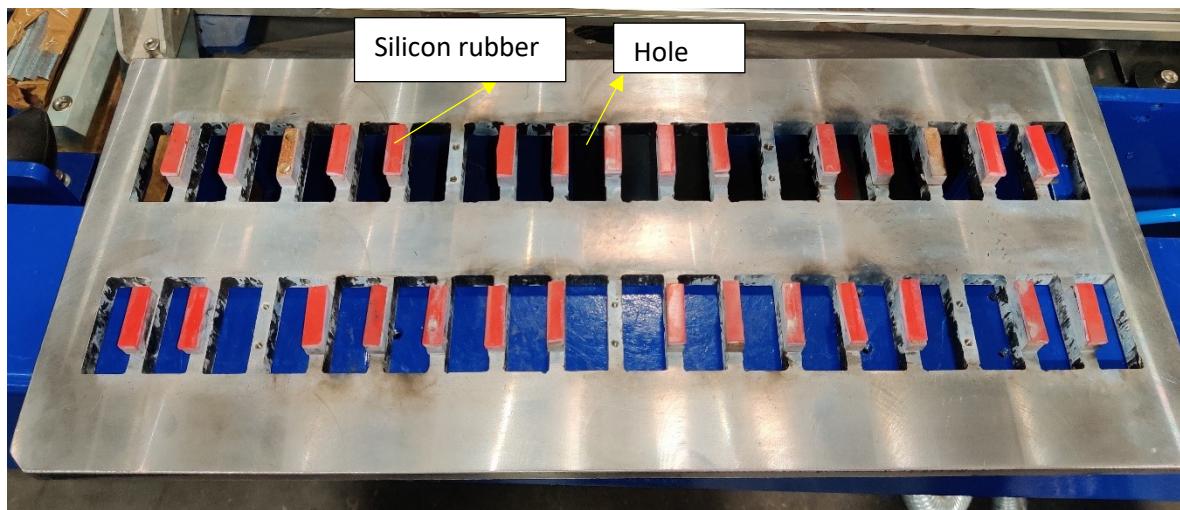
top part of fixture used to reduce the gap between laser welding
